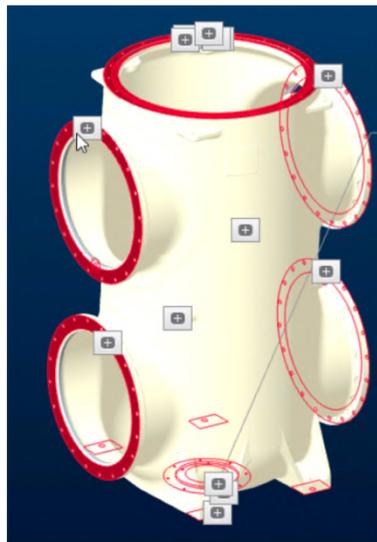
Drawing of the Circuit Breaker Housing number 17650.
